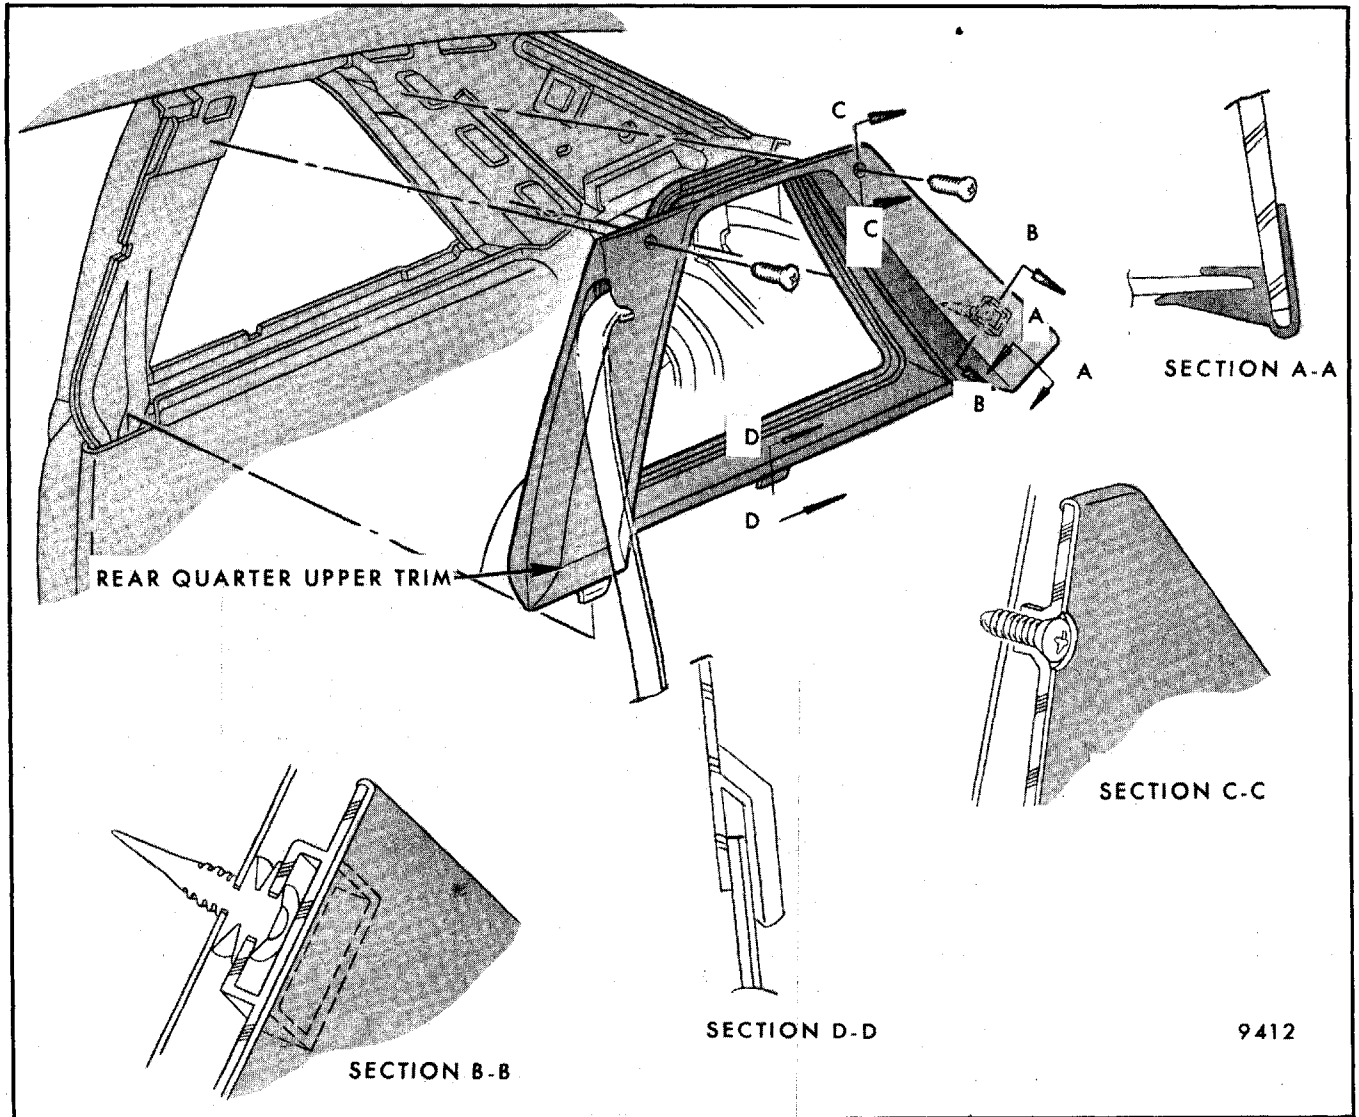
Quarter Upper Trim Attachment - "C" Style Shown
